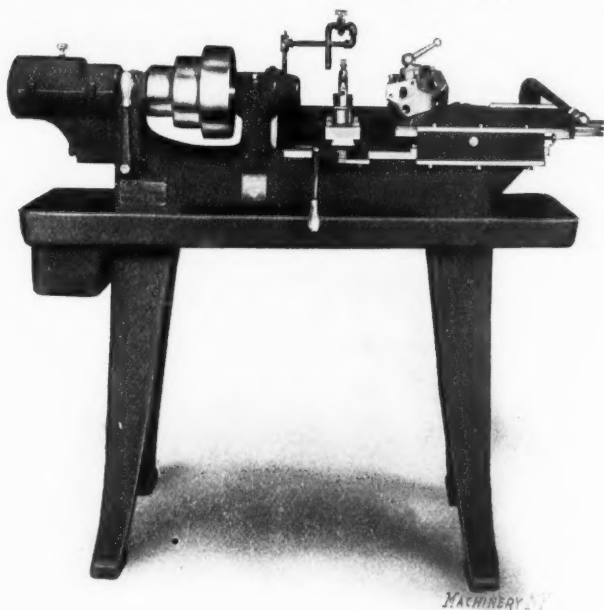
No. 1 Size Tilted Turret Screw Machine
